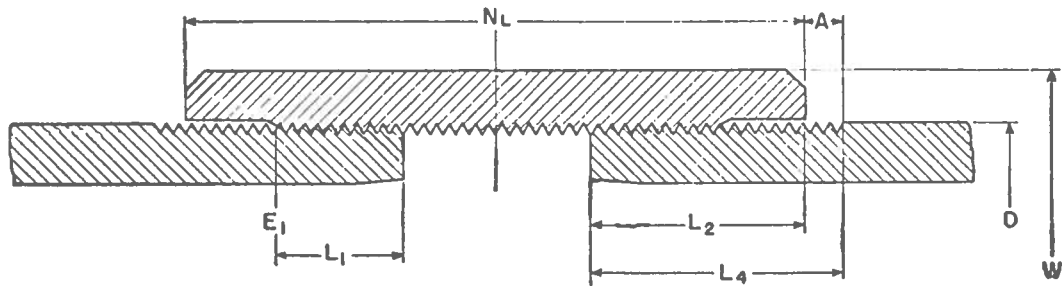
Dimensions of Hand Tight Assembly for Use with Table A6.
